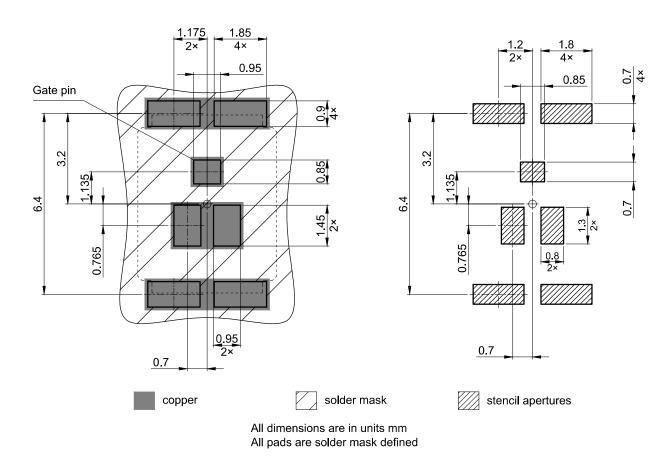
Outline Footprint (MG-WDSON-5), dimensions in mm
